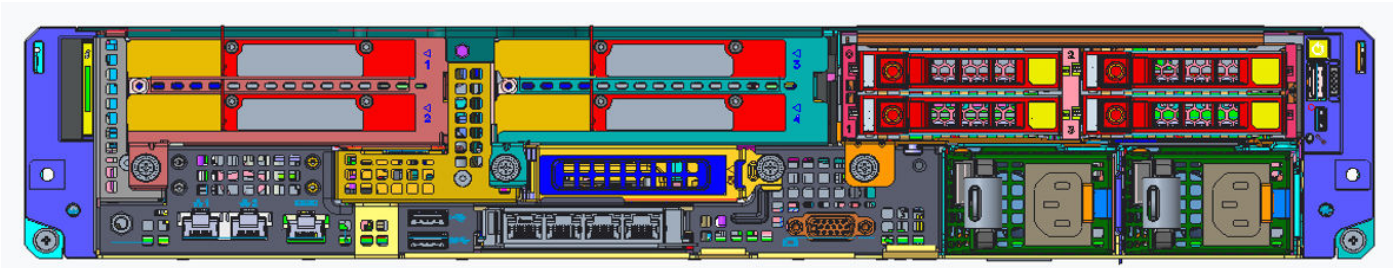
XR7620 Front accessed FHHL 4 x 2.5 chassis
